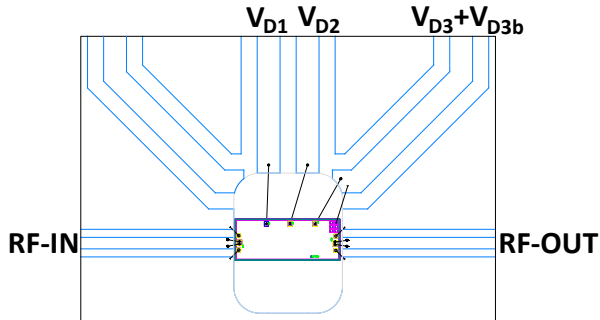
PMA4-8243LN-D+ Assembly Diagram
